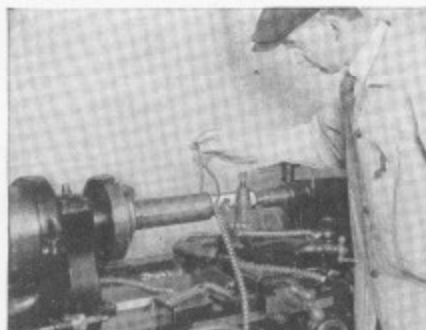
Taking a Heavy Roughing Cut to Reduce the Diameter of a Steel Shaft.
